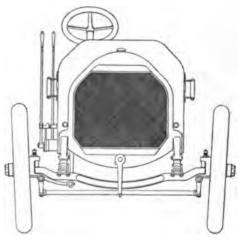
The Moore Oar, Front end view; note strong construction of steering knuckles.
